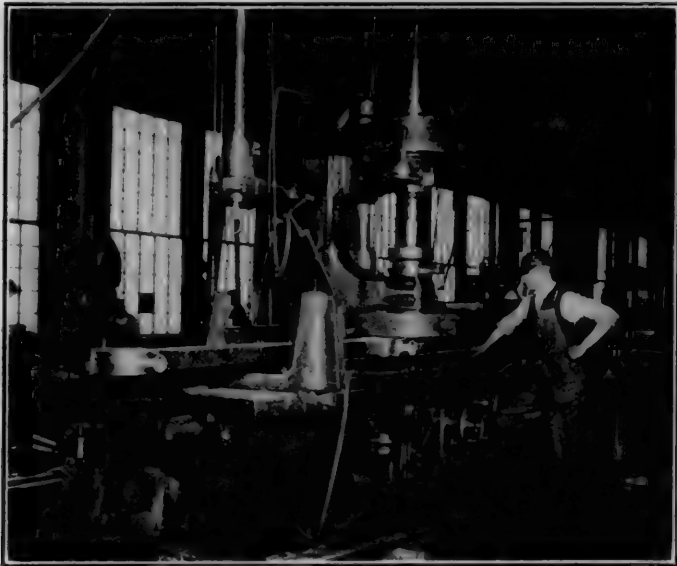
Locomotive Side Rod Being Finished on a Surface Grinder
